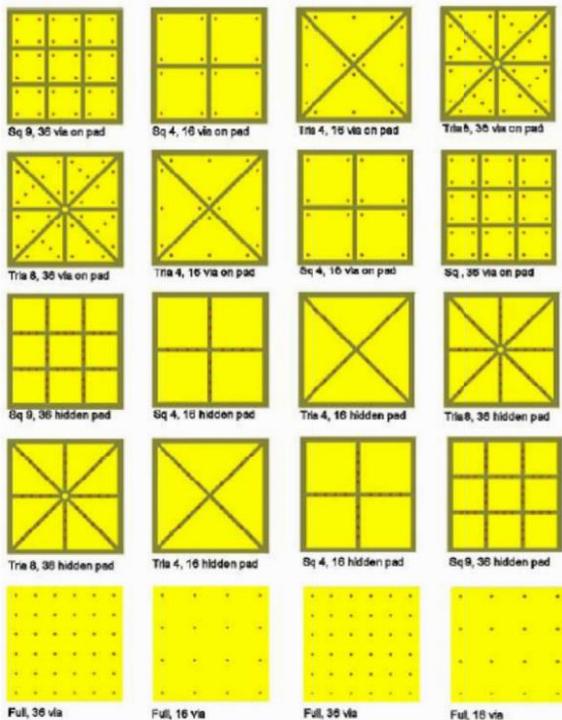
Pad design of the QFN test board showing thermal pad patterns¹
